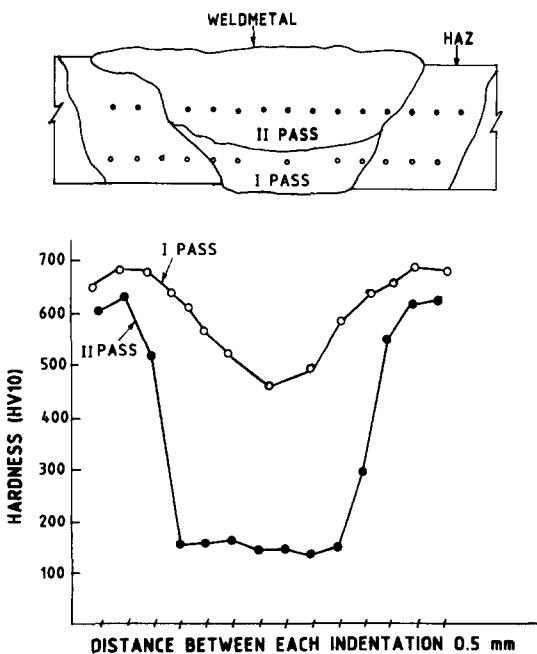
Hardness survey across the 18-8-6 weldment in the 1st and 2nd pass.
